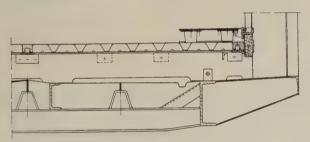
Steel frame and floor of D.B. refrigerated wagon in section. Scale 1: 20.
